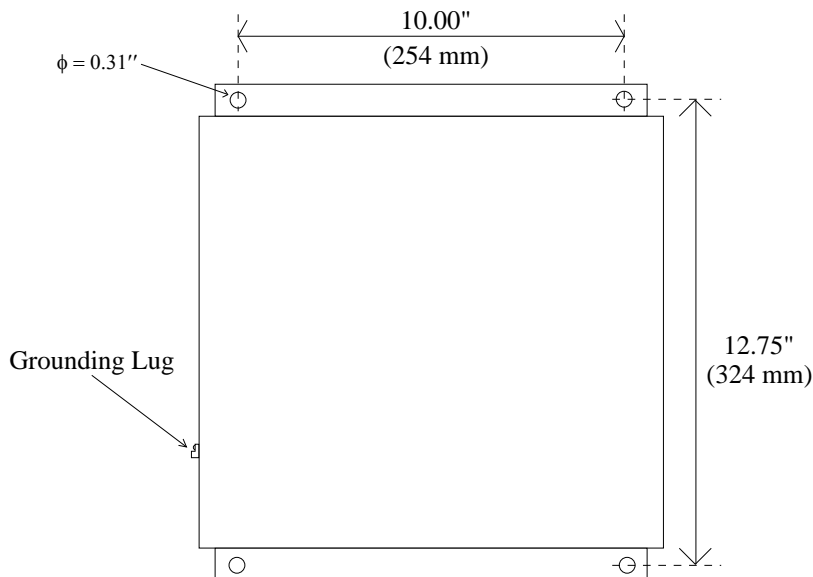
Multiplexer Enclosure Mounting Dimensions
